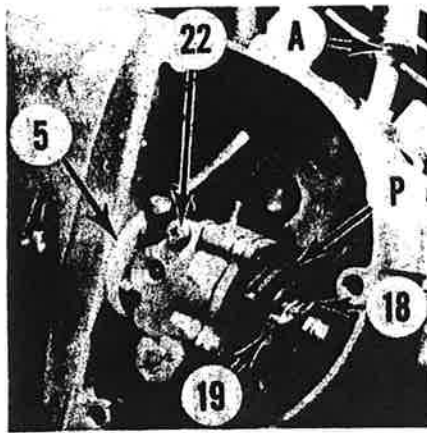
View of typical oil pump assembly. Pin, beneath cover plate (19), should align with mark on adjustment pulley (P) just before throttle slide begins to move. Use cable adjuster (A) to align marks.
